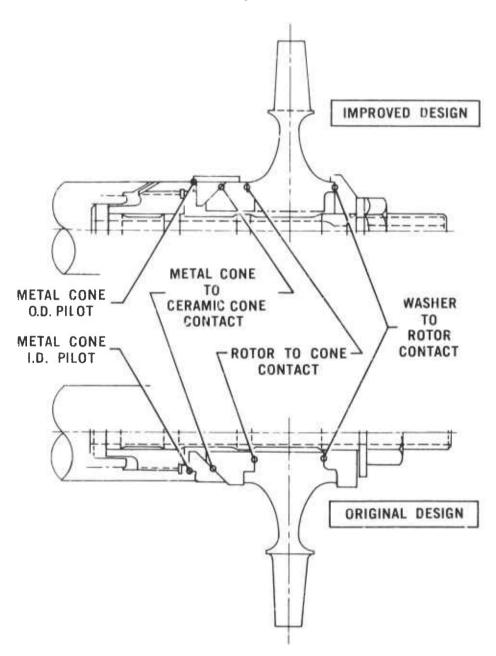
Improved Rotor Mounting Configuration in Hot Spin Rig.
